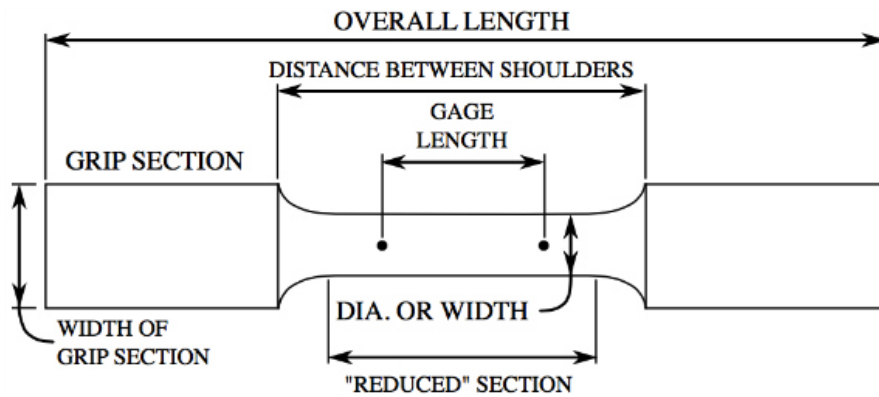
FLAT SHOULDERED TEST SPECIMEN
